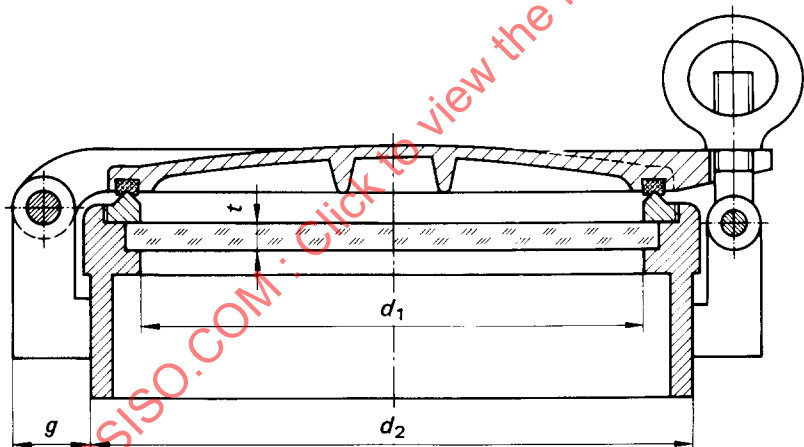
Non-opening side scuttle with deadlight, welded
